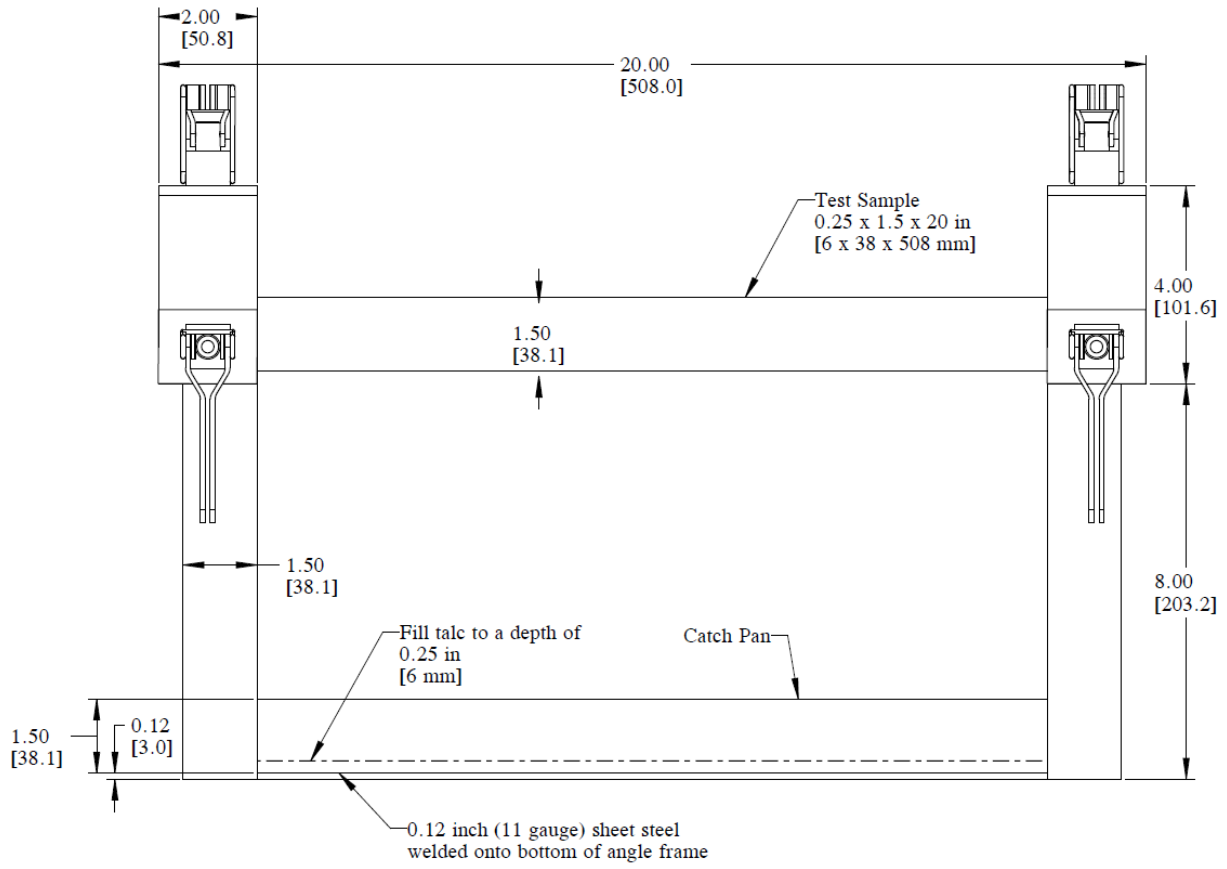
Magnesium Alloy Test Sample Mounting Stand and Holder (Front)
